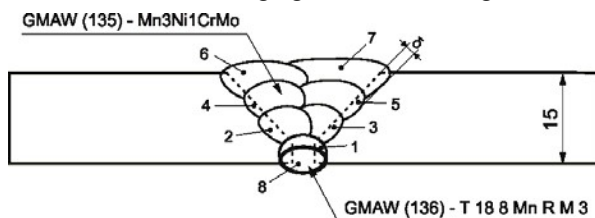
Applying a weld bead using the MAG/MAG method
